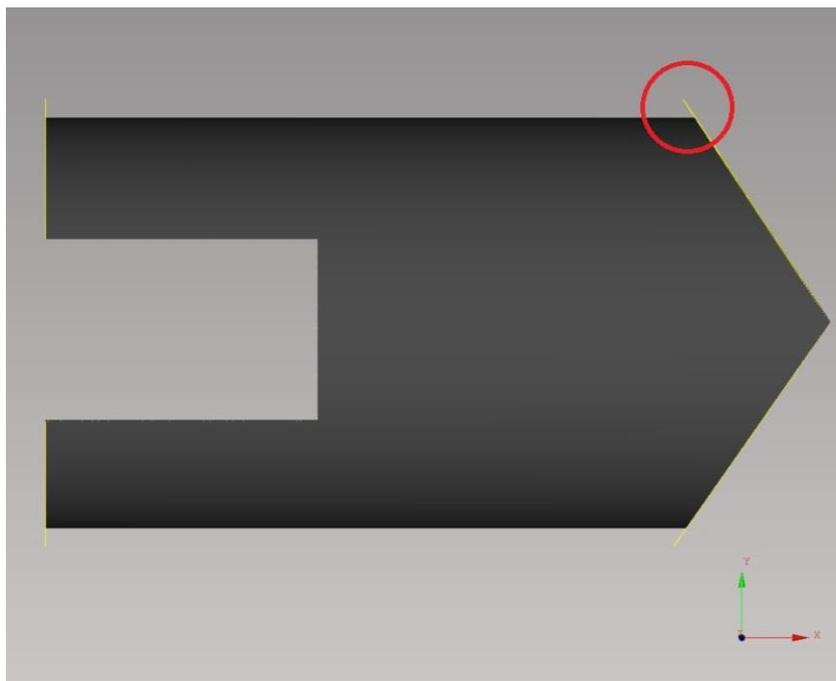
Side-view on raw-processed cutting paths (bevel cutting)
